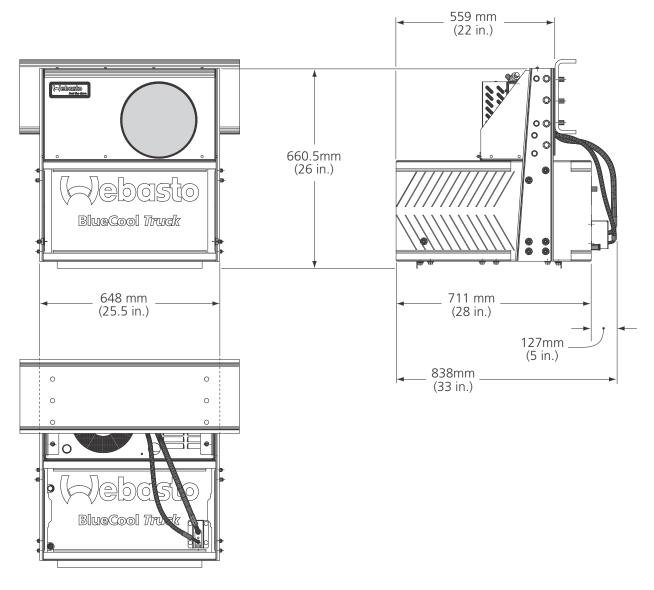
Dimensions - Refrigeration/Cold Storage Assembly
